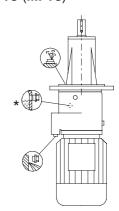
Mounting positions for DR/ZR Size 60/61 - 162
